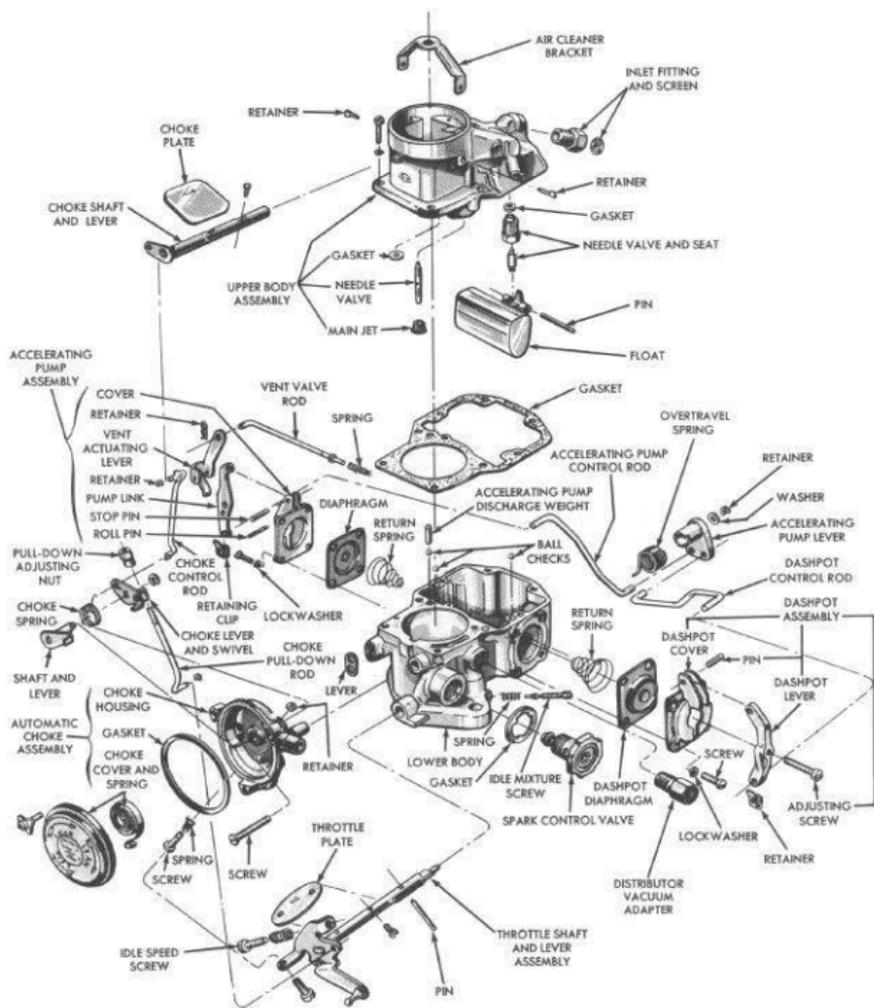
Single Barrel Carburetor With Automatic Choke—Disassembled
